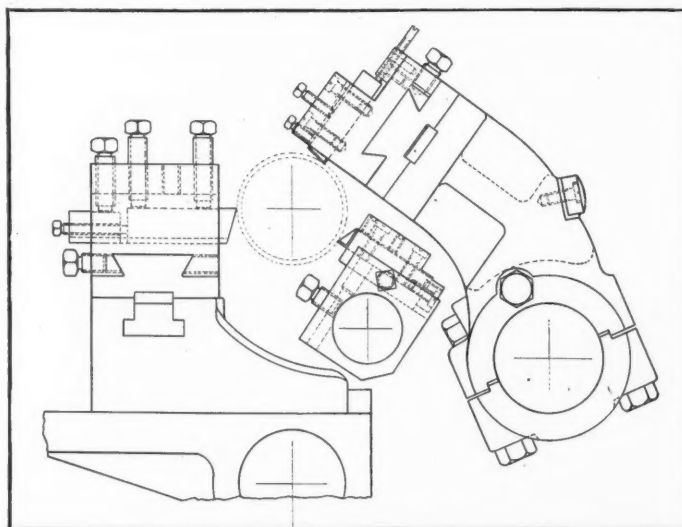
Illustration showing the Intermediate Holder of the Tooling in Fig. 16
